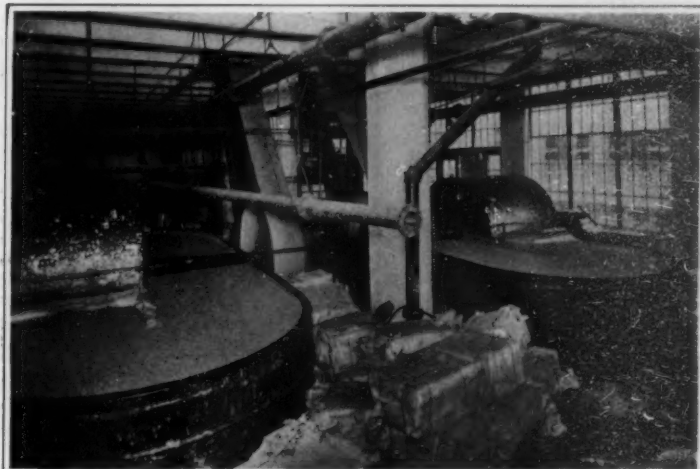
Beating engines in a Brooklyn paper mill; each holds a ton of pulp.
